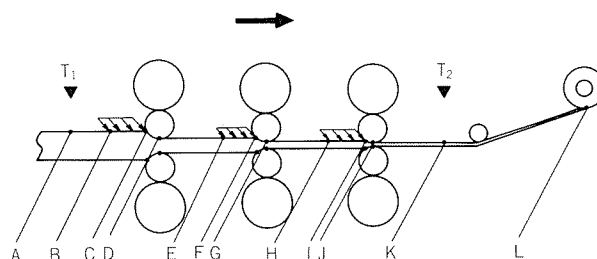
Schematic layout of the hot strip mill line of aluminium.
